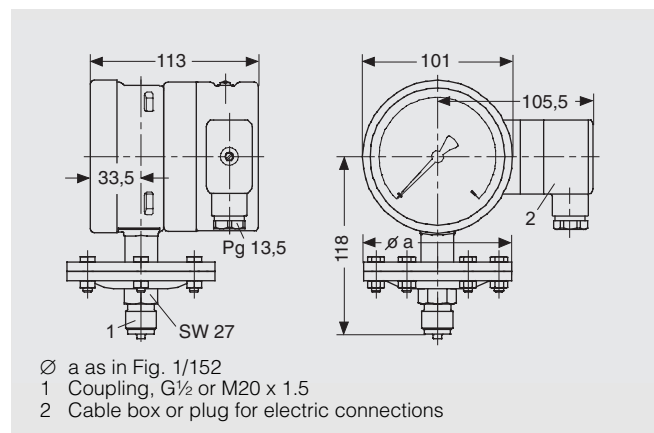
/153 Pressure gauge with remote transmitter, measuring flange closed; dimensions
